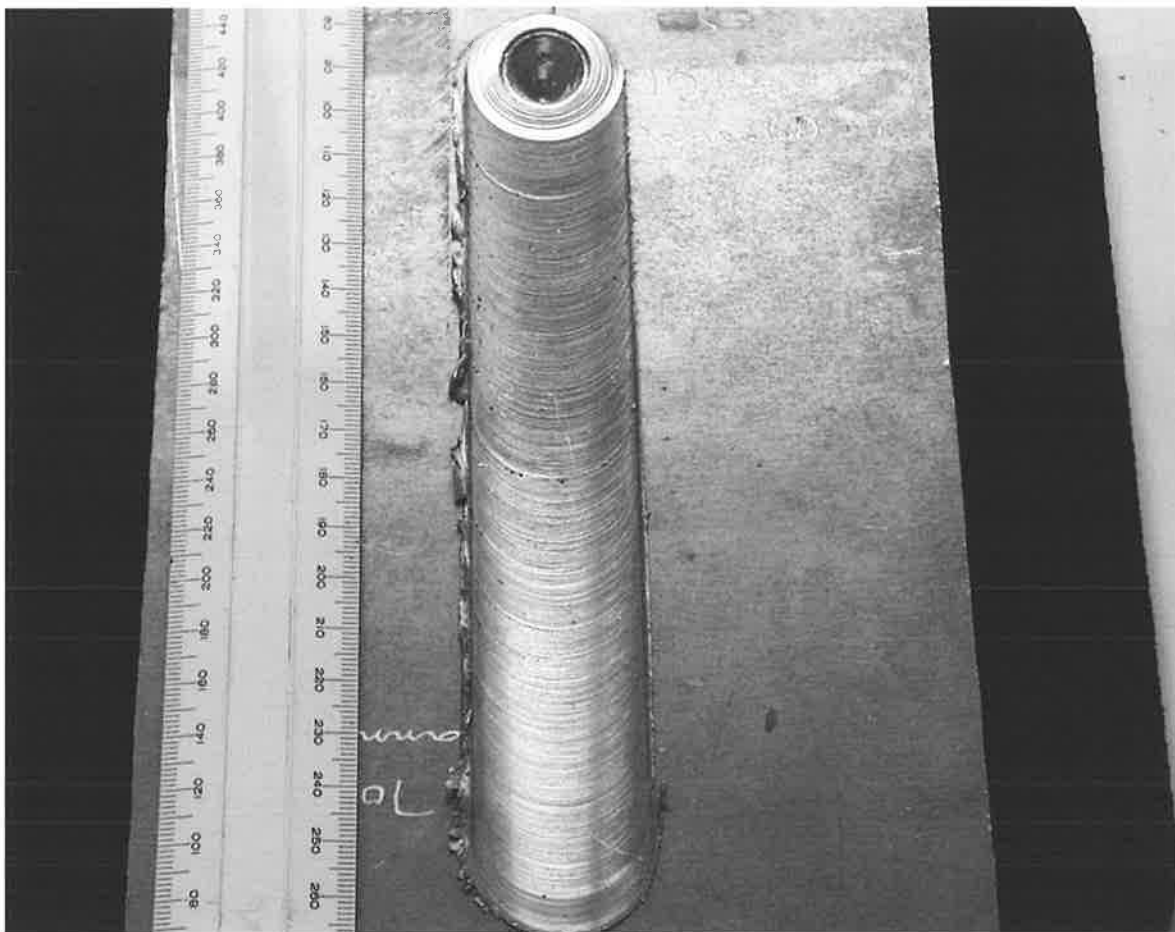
Top view B.O.P. weld 614F made in AA7075 O
